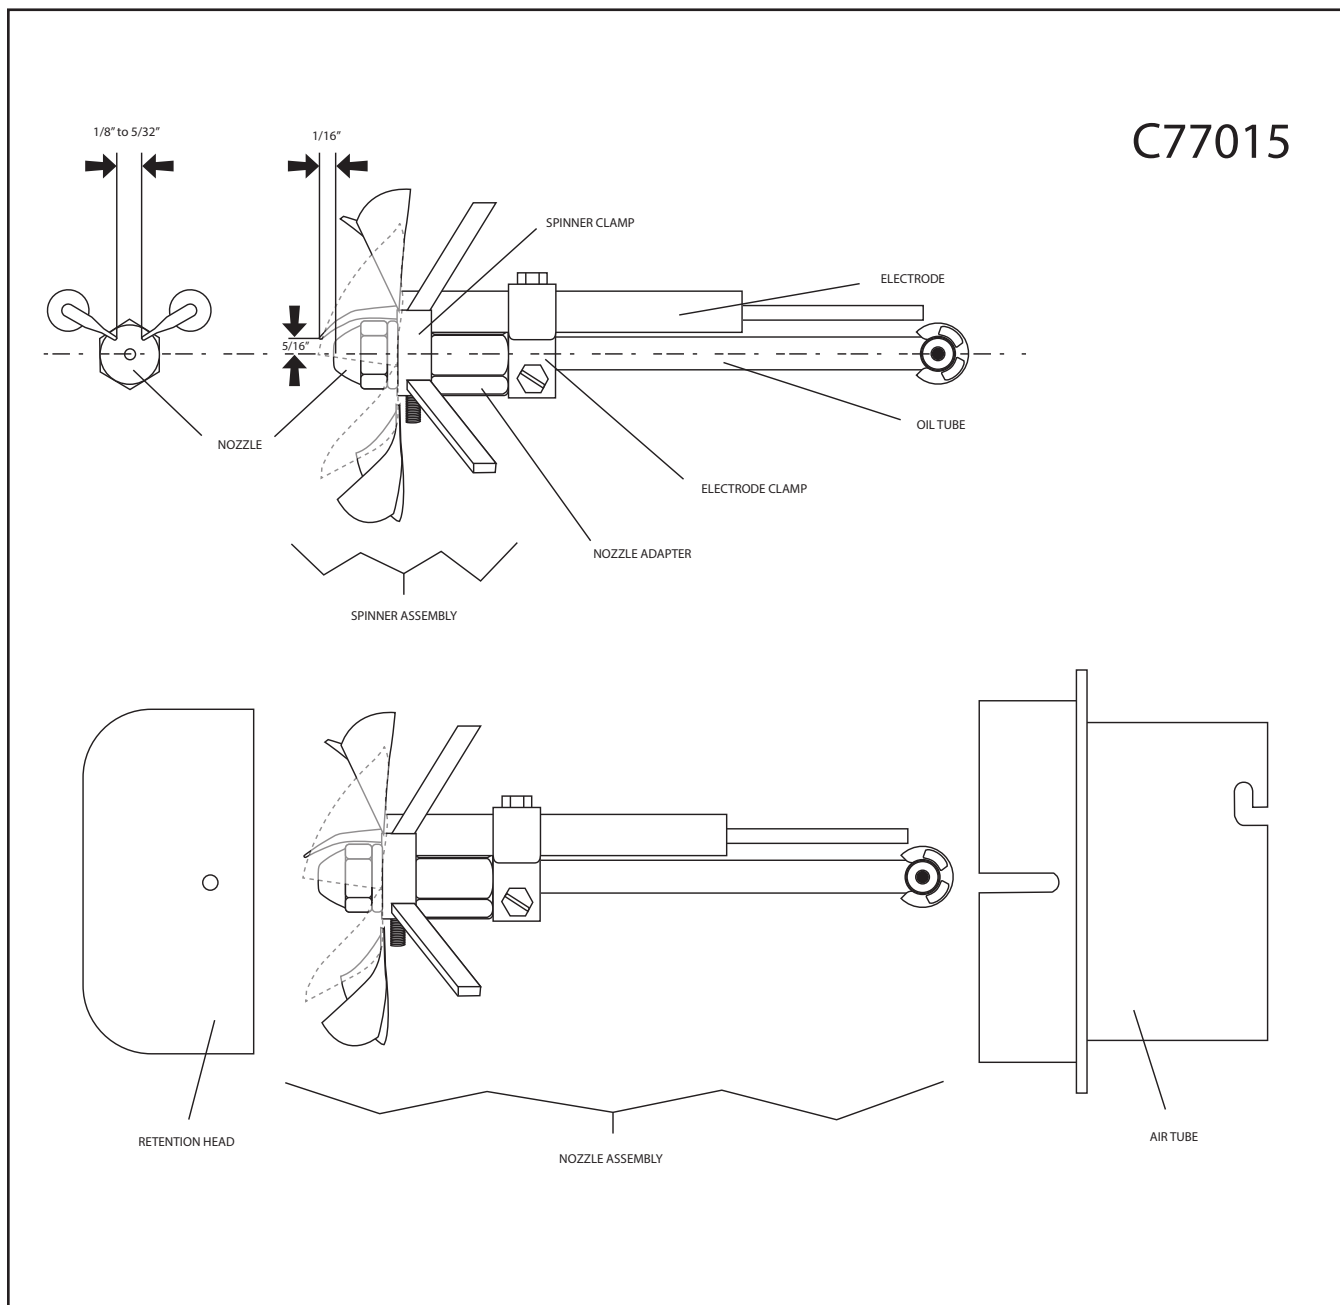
F: INSERTING / REMOVING NOZZLE HEAD ASSEMBLY
